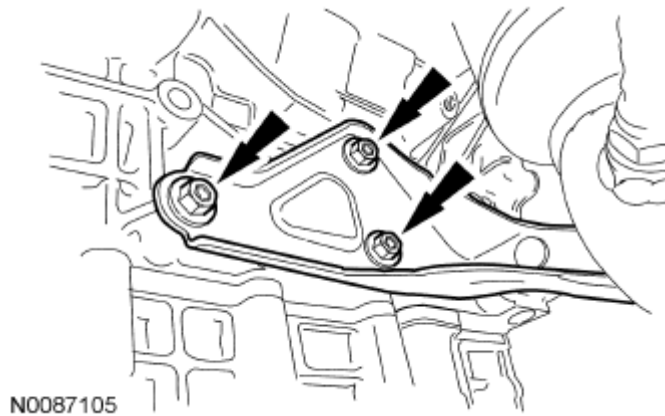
Locating RH Transaxle Support Insulator Bolt
